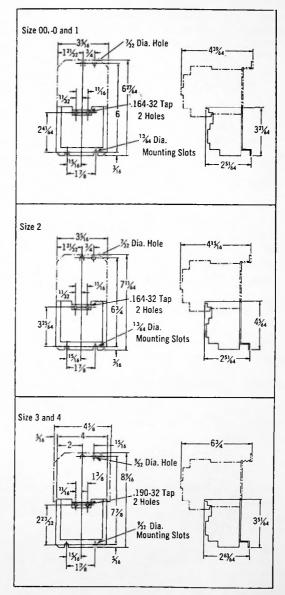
Mounting Dimensions for Latched A/200 Contactors
